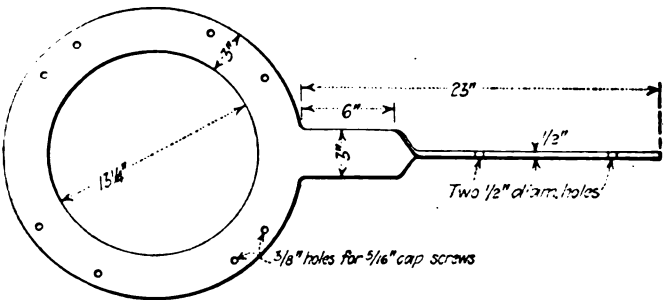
FIXTURE FOR HOLDING TRANSMISSION CASES
